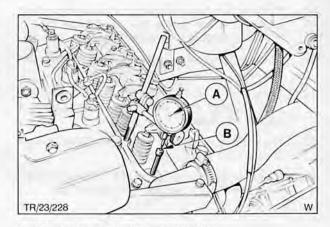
Engine set at spill timing position A – Metric dial gauge B – Exhaust valve stem
